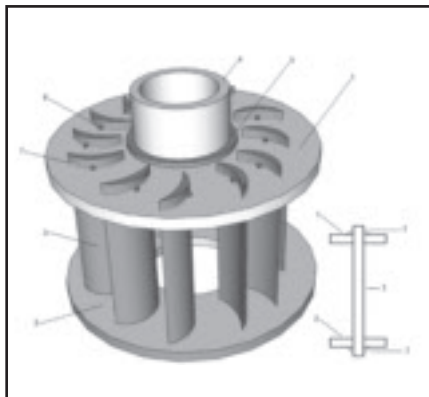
Titanium impeller assembled to be brazed: Design B. 1 and 2 — support plates, 3 — blades, 4 — tubing, 5 — braze preform, 6 — arc-spot welding for fixing blades, 7 — brazing paste.
